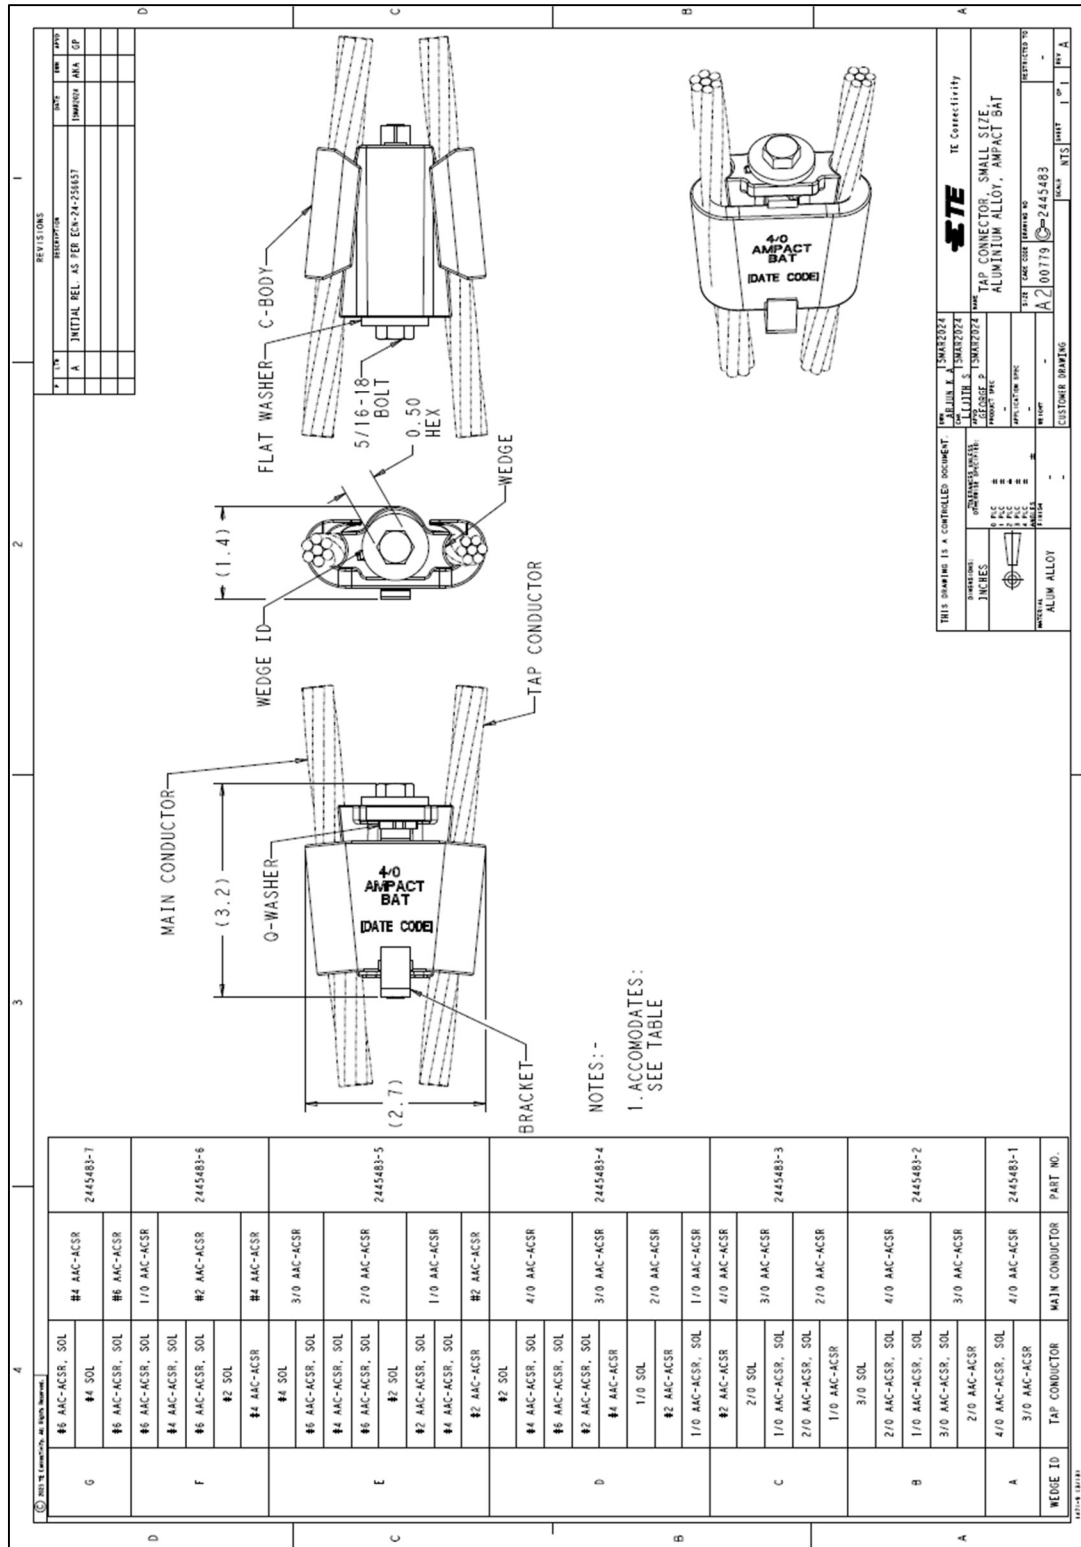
Customer Drawing of AMPACT BAT – Small connector P/N 2445483
